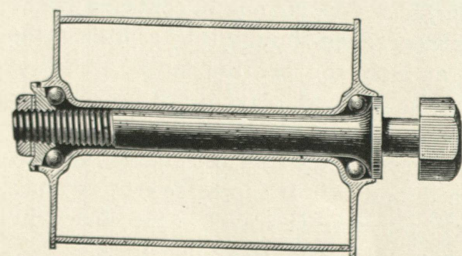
SECTIONAL VIEW OF PEDAL, SHOWING BALL BEARINGS.
